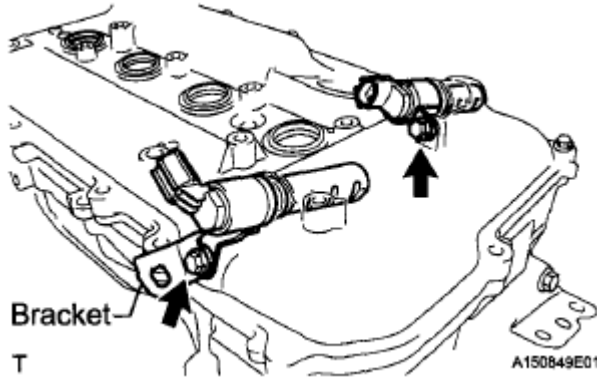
Locating Camshaft Timing Oil Control Valves And Bracket
